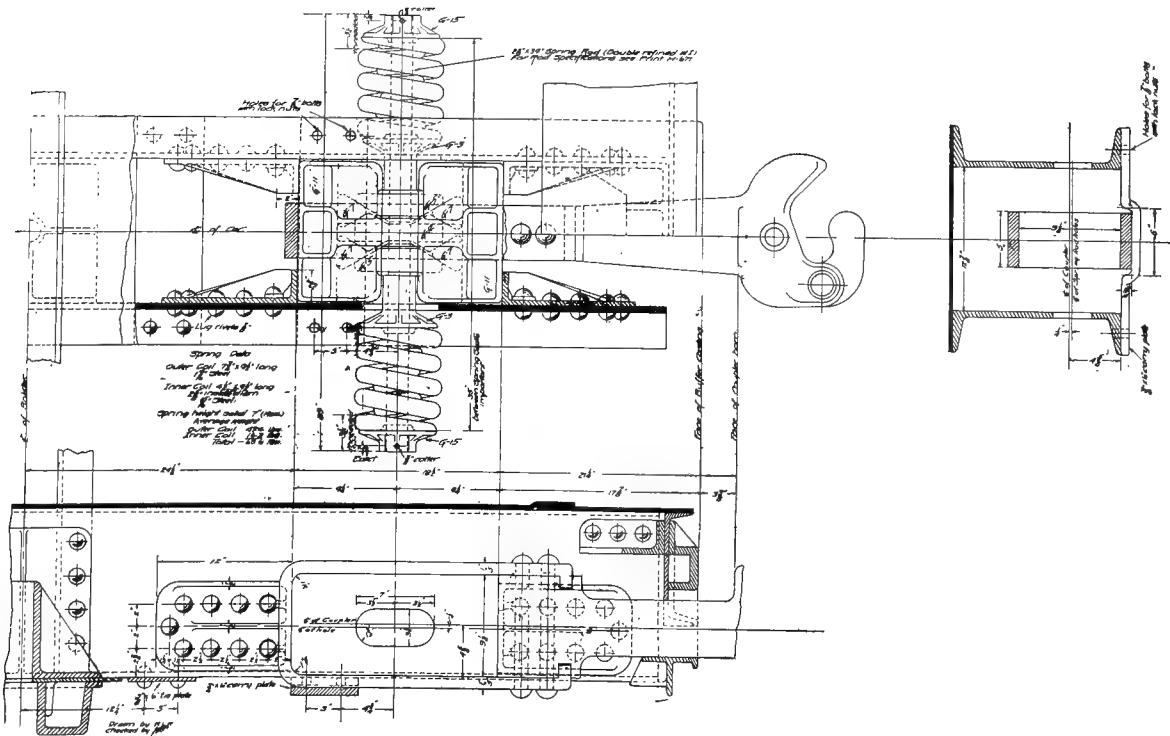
Cardwell Friction Draft Gear, Type G, Class 11, for Tank Cars. Union Draft Gear Company.
